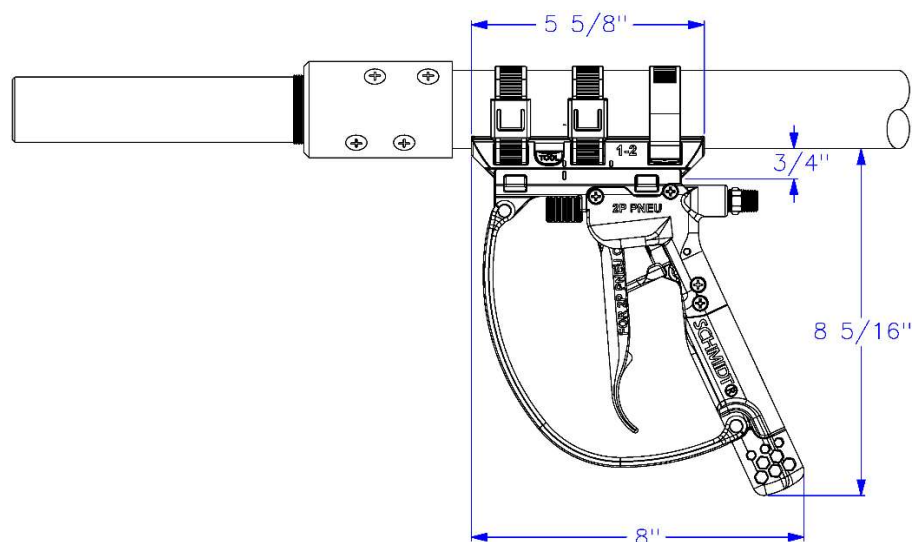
BAABS G3 Swivel Strap Assembly Dimensions
